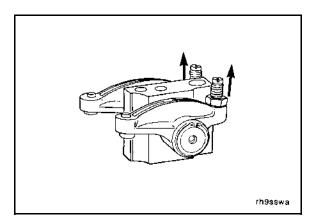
LOOSEN THE ROCKER LEVER ADJUSTING SCREWS
